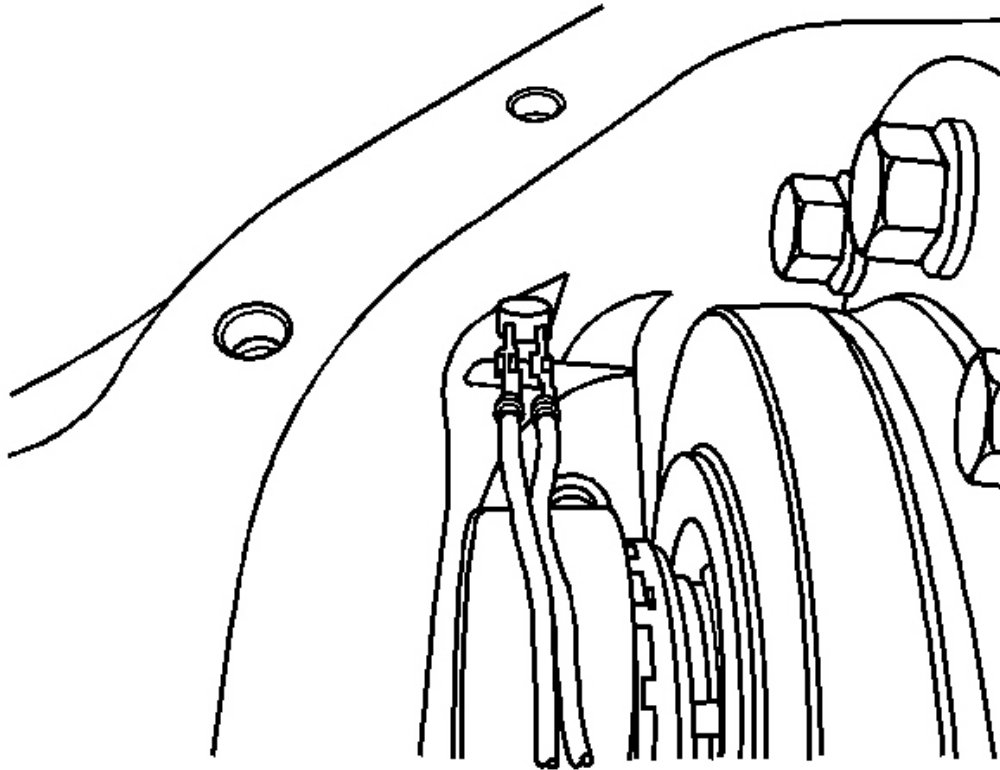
Locking Differential Coil Assembly Wiring From Axle Housing
